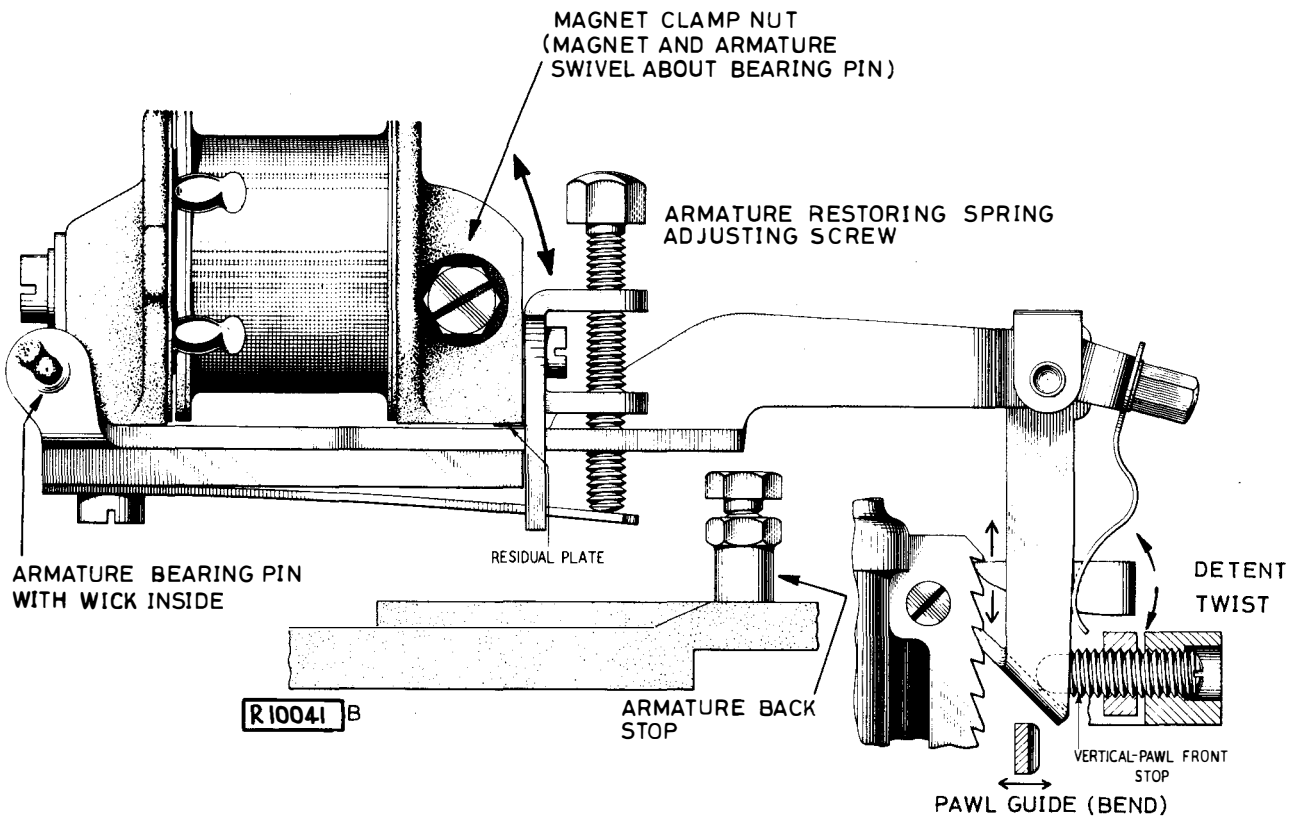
Some Bending and Screw Adjustments on the BPO 2000 Type Selector Vertical Magnet Assembly.
